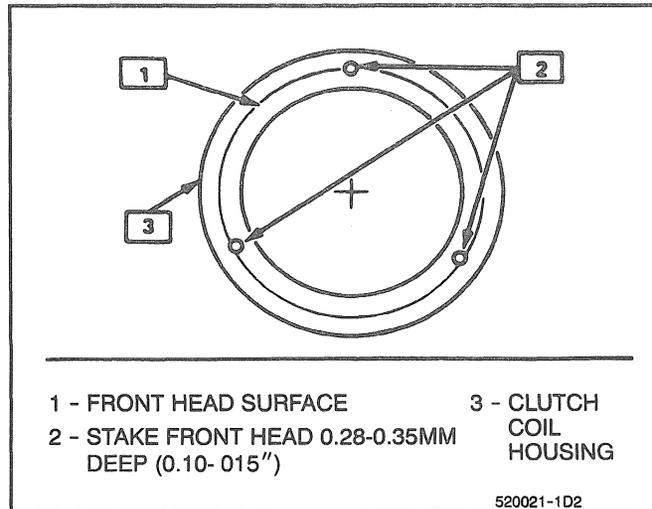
Details of Stakes in Front Head for Clutch Coil
